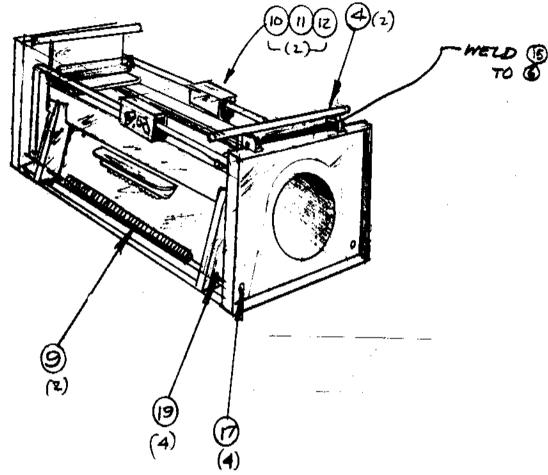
ATTACH DOORS WITH HINGEPIN (15), WELD IN PLACE, AND PUT SPRINGS (9), CONNECTORS (19), AND ATTACHMENTS (17) IN PLACE. UNIT IS NOW COMPLETE EXCEPT FOR PARTS 10, 11 AND 12, WHICH NOW CAN BE INSTALLED.
